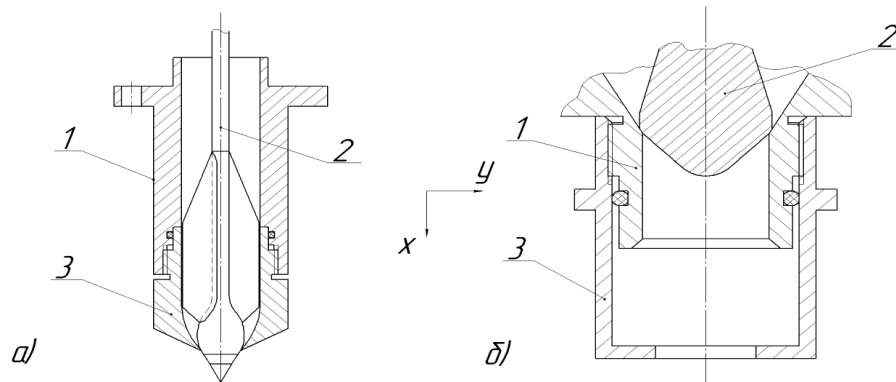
Construction of the operating device in dosing weighing devices: a) conical; b) cylindrical: 1 – housing; 2- valve; 3 – nozzle.
